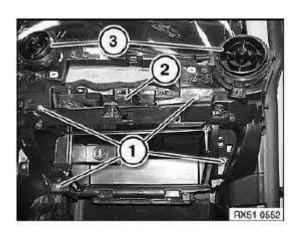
Identifying Instrument Panel Lower Section And Vents Courtesy of BMW OF NORTH AMERICA, INC.
